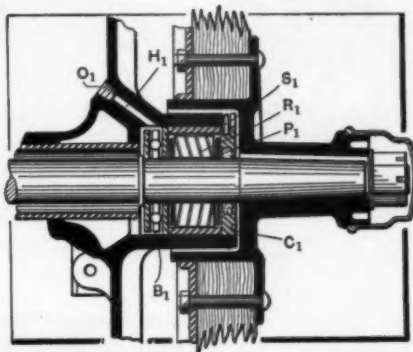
Section of a live rear axle, showing the use of a Hyatt roller bearing in combination with a ball-thrust bearing taking radial and endwise loading.
